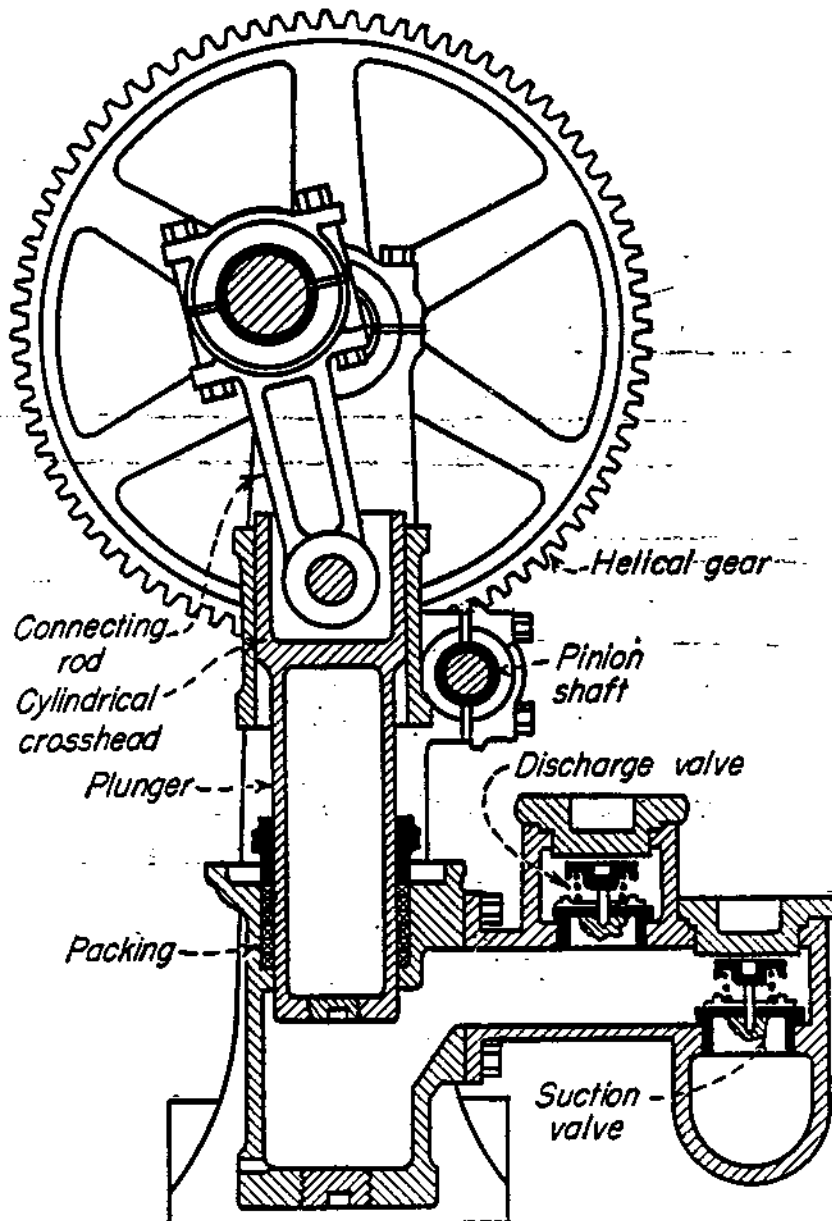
Cross section through open-frame vertical triplex plunger-type power pump.
